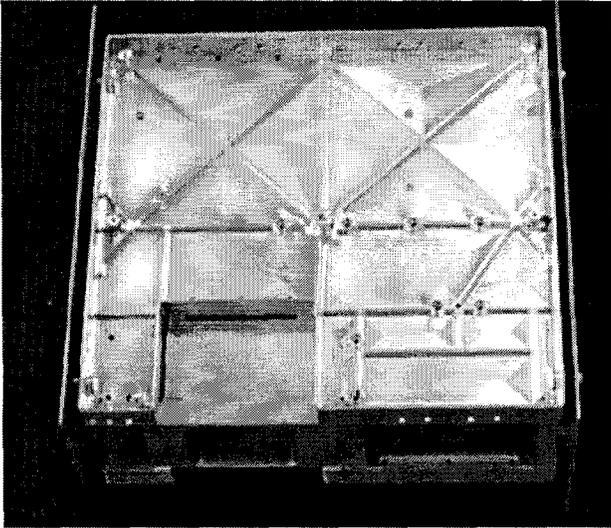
The top of the Muses-CN Optical test bench, which the electronics boards assemblies will mount to both sides of this assembly.
